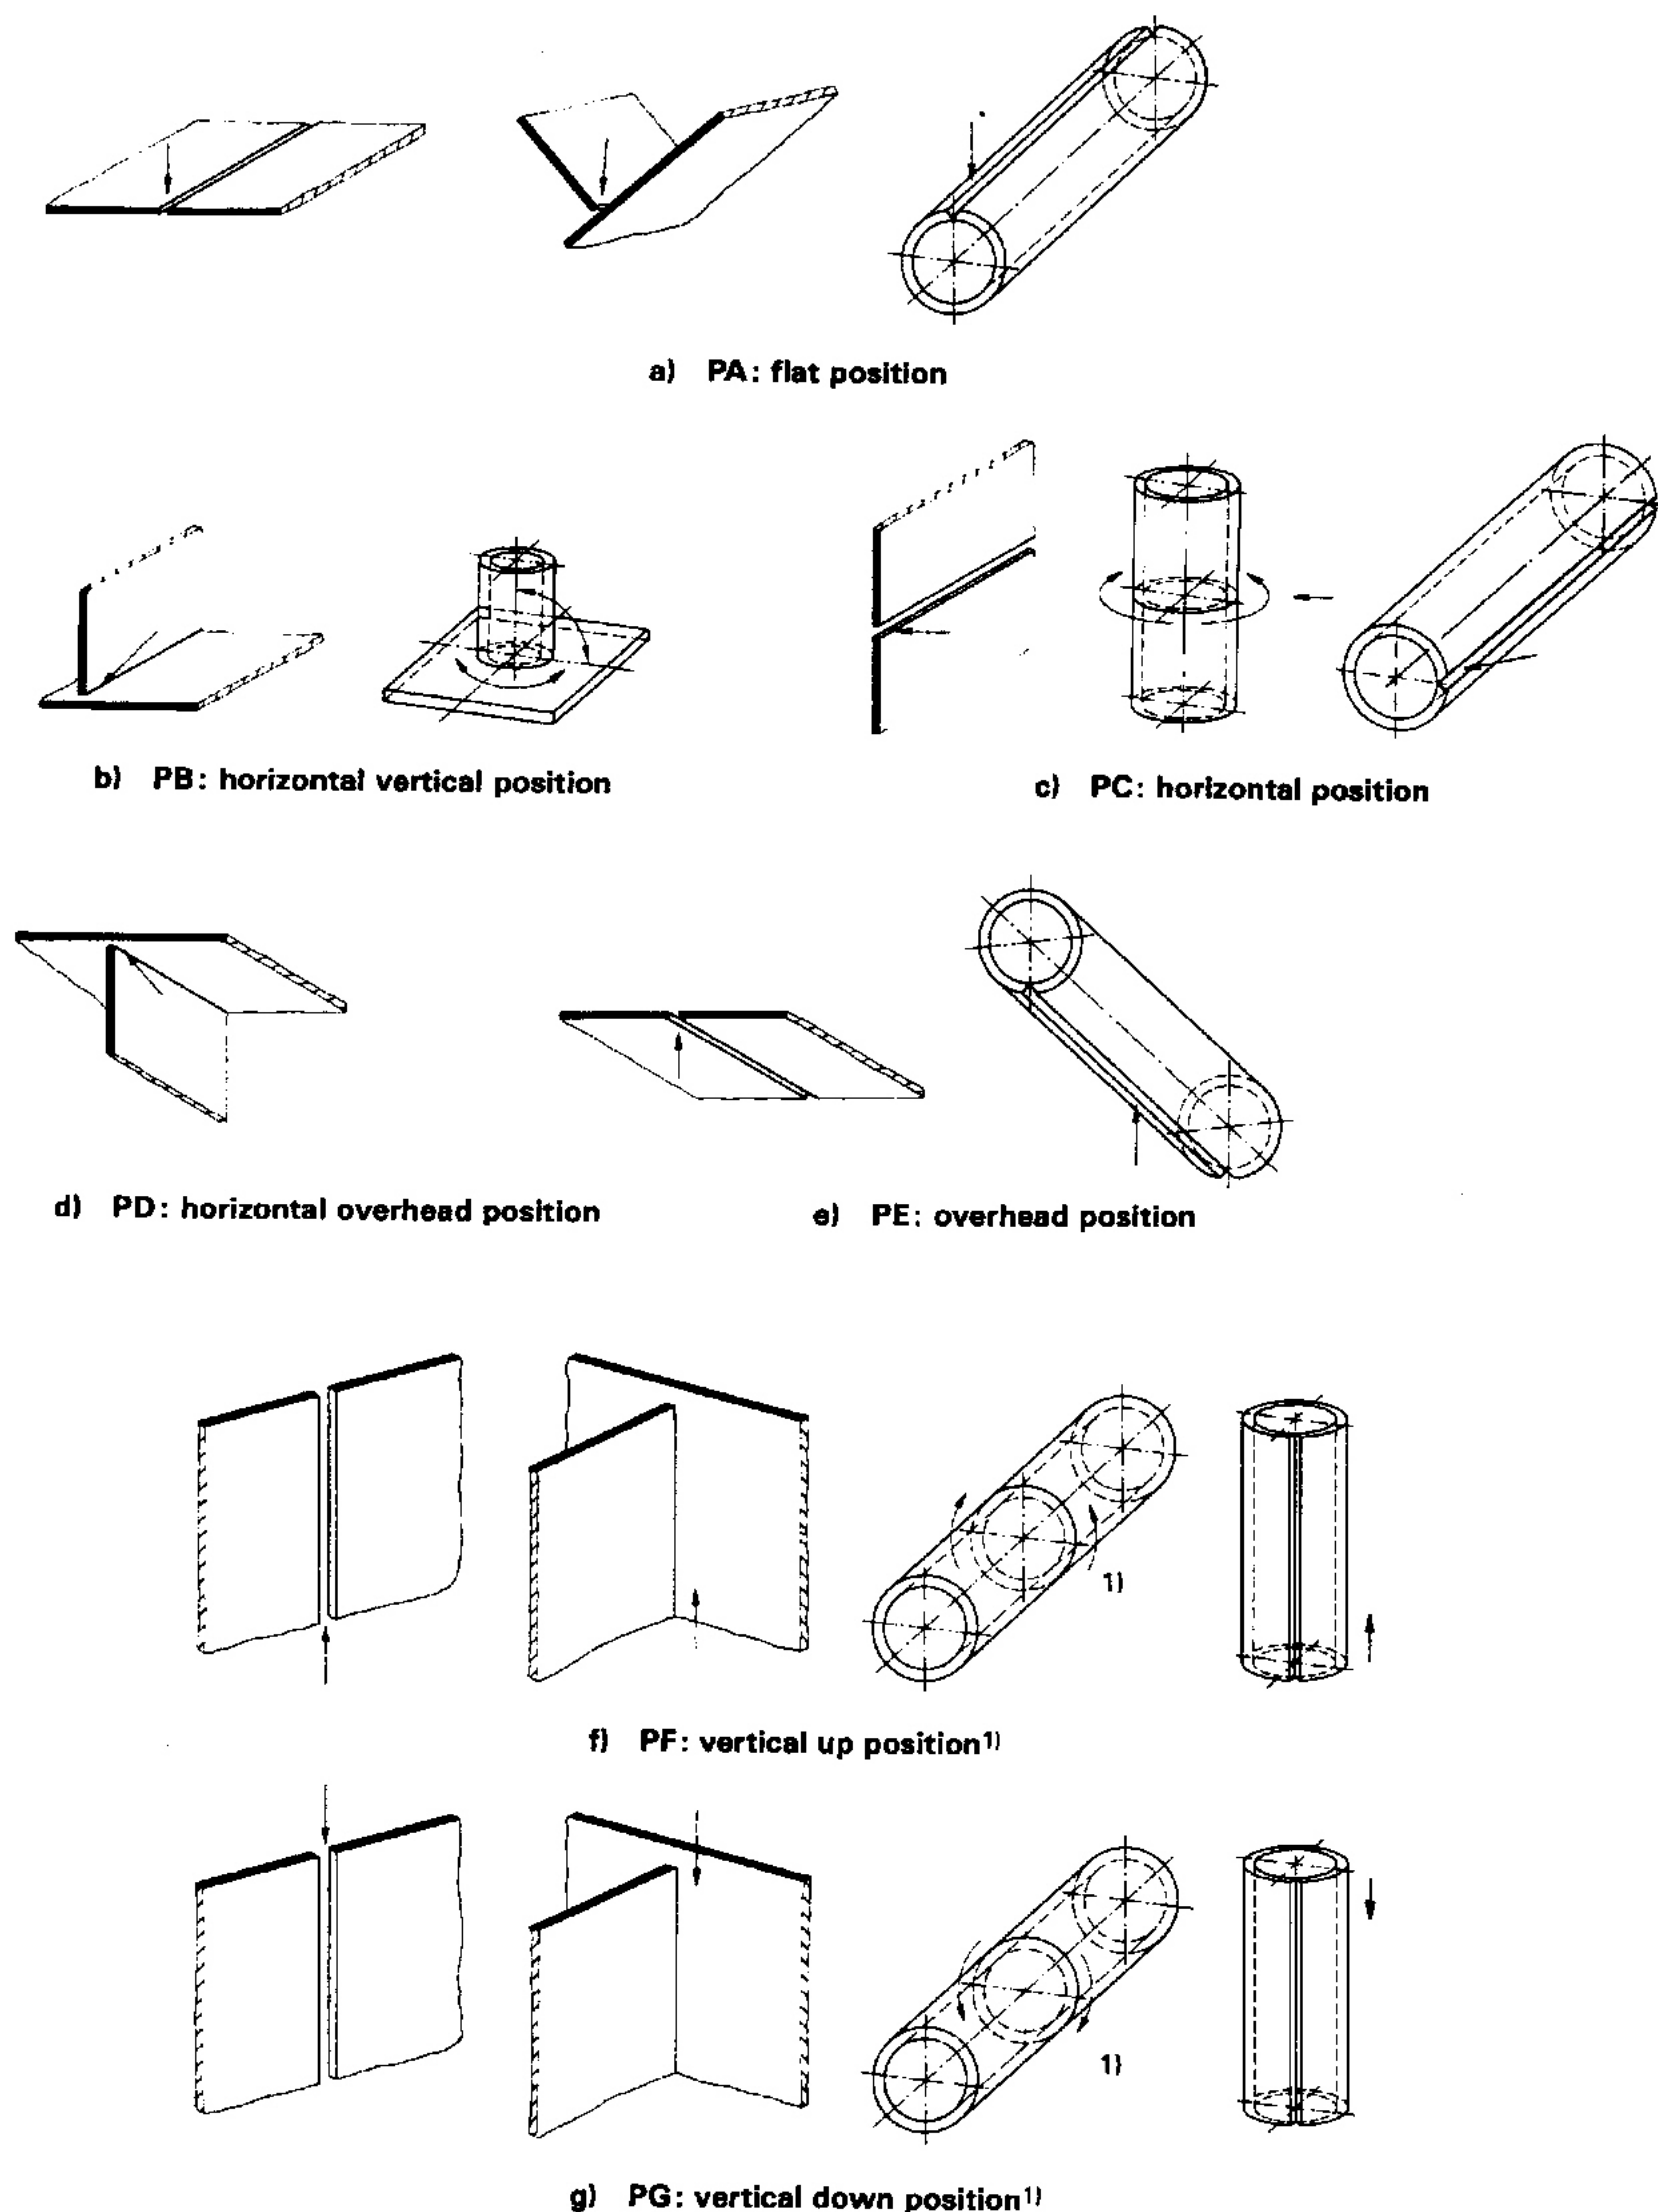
Examples of main positions for butt and fillet welds
